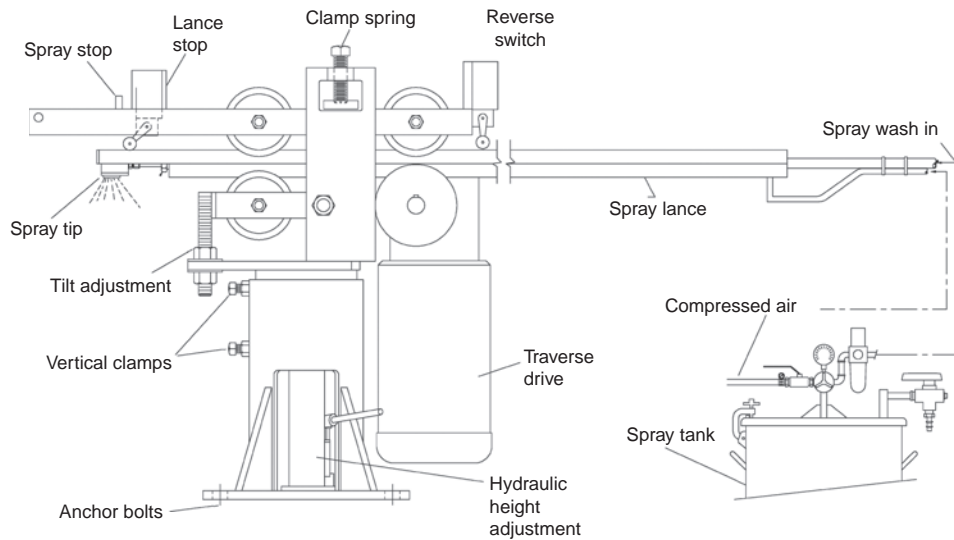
Patented automatic mold wash spray assembly. Courtesy of the Centrifugal Casting Machine Company
